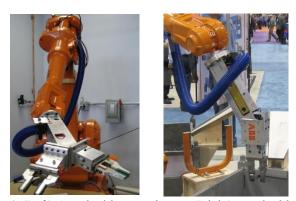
(Left) A tool with two grippers. (Right) a tool with one gripper.
